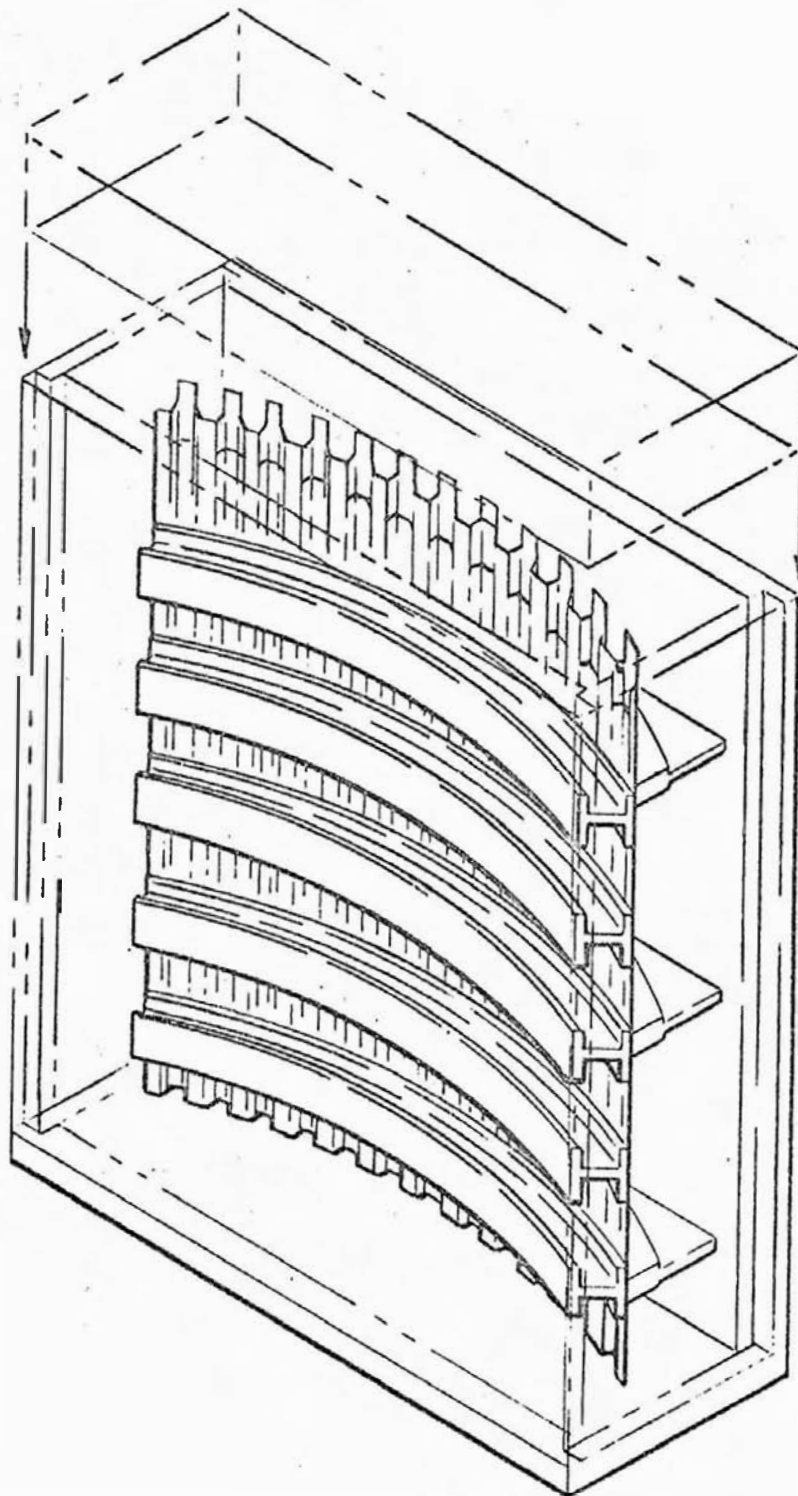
Intertank Skin Panel Subassembly Shipping Fixture StR-370-7295
